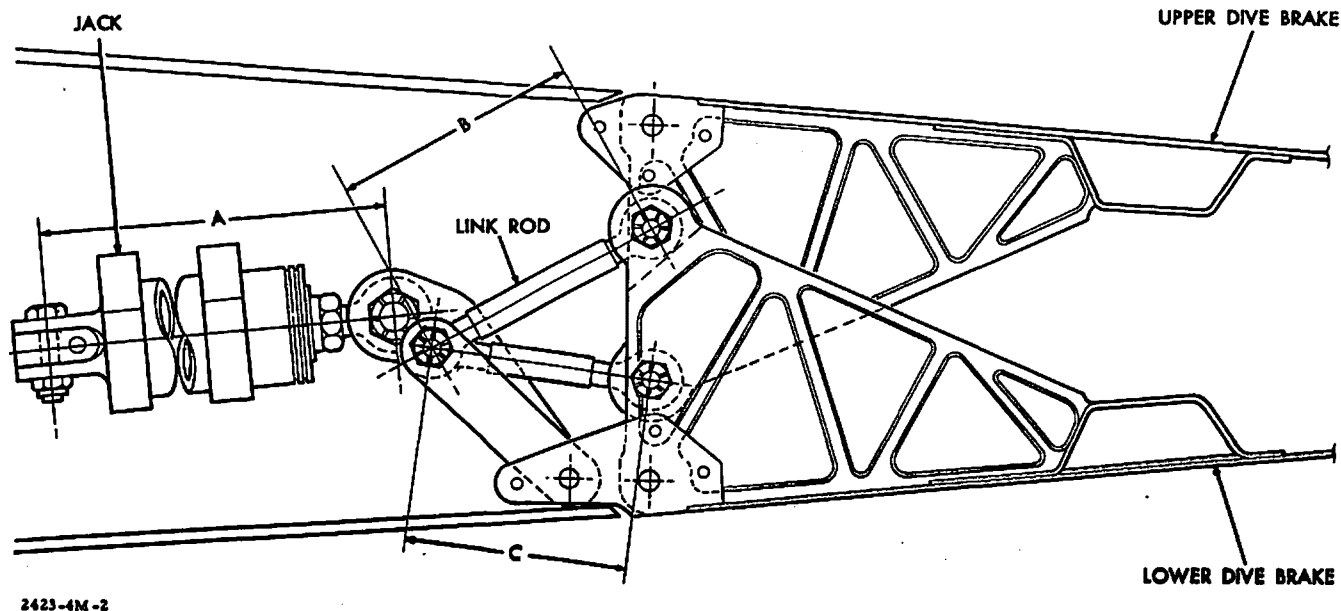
Dive Brakes Rigging Dimensions
